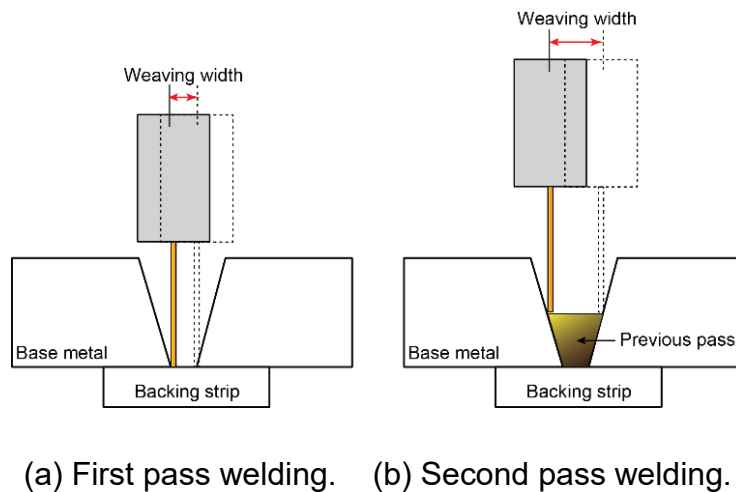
Weaving method for CO₂ arc welding torch.
